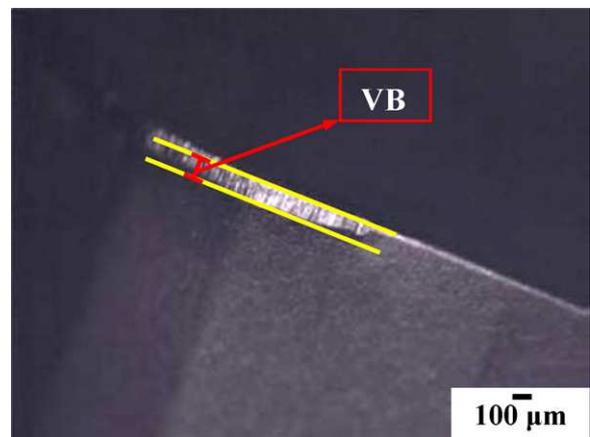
Flank wear land at a cutting speed of 1000 m/min after machining five workpieces.
